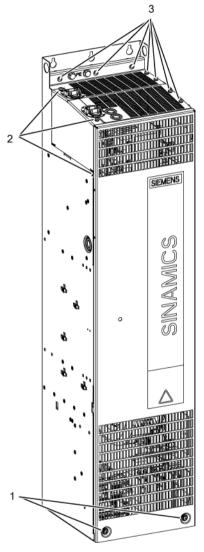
Installing the Braking Module in an Active Line Module / Motor Module, frame size FX – steps 1 - 3
